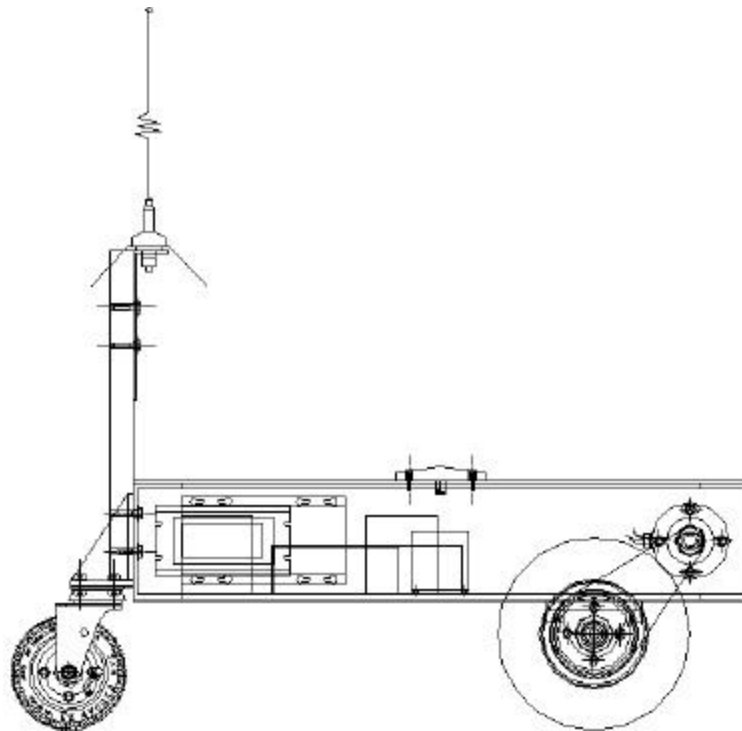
Side View of Leonard (Drawing Courtesy of John Christ)
